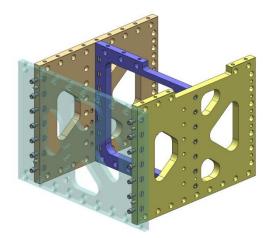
Partial assembly of Boxwork, showing screws threaded into Barrel Nuts. Center-Tangential Rib is shown transparent, here.
